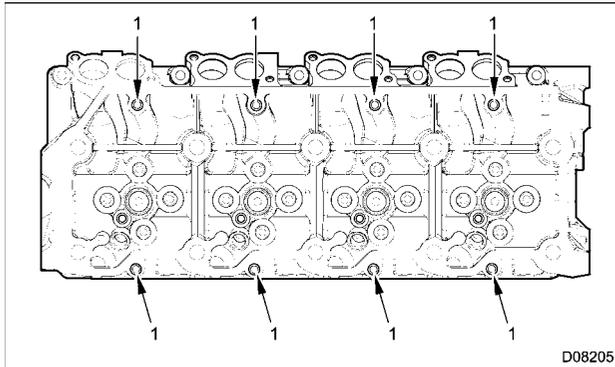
2004 and 2005 Model Year cylinder head (eight tapped M8 holes)
